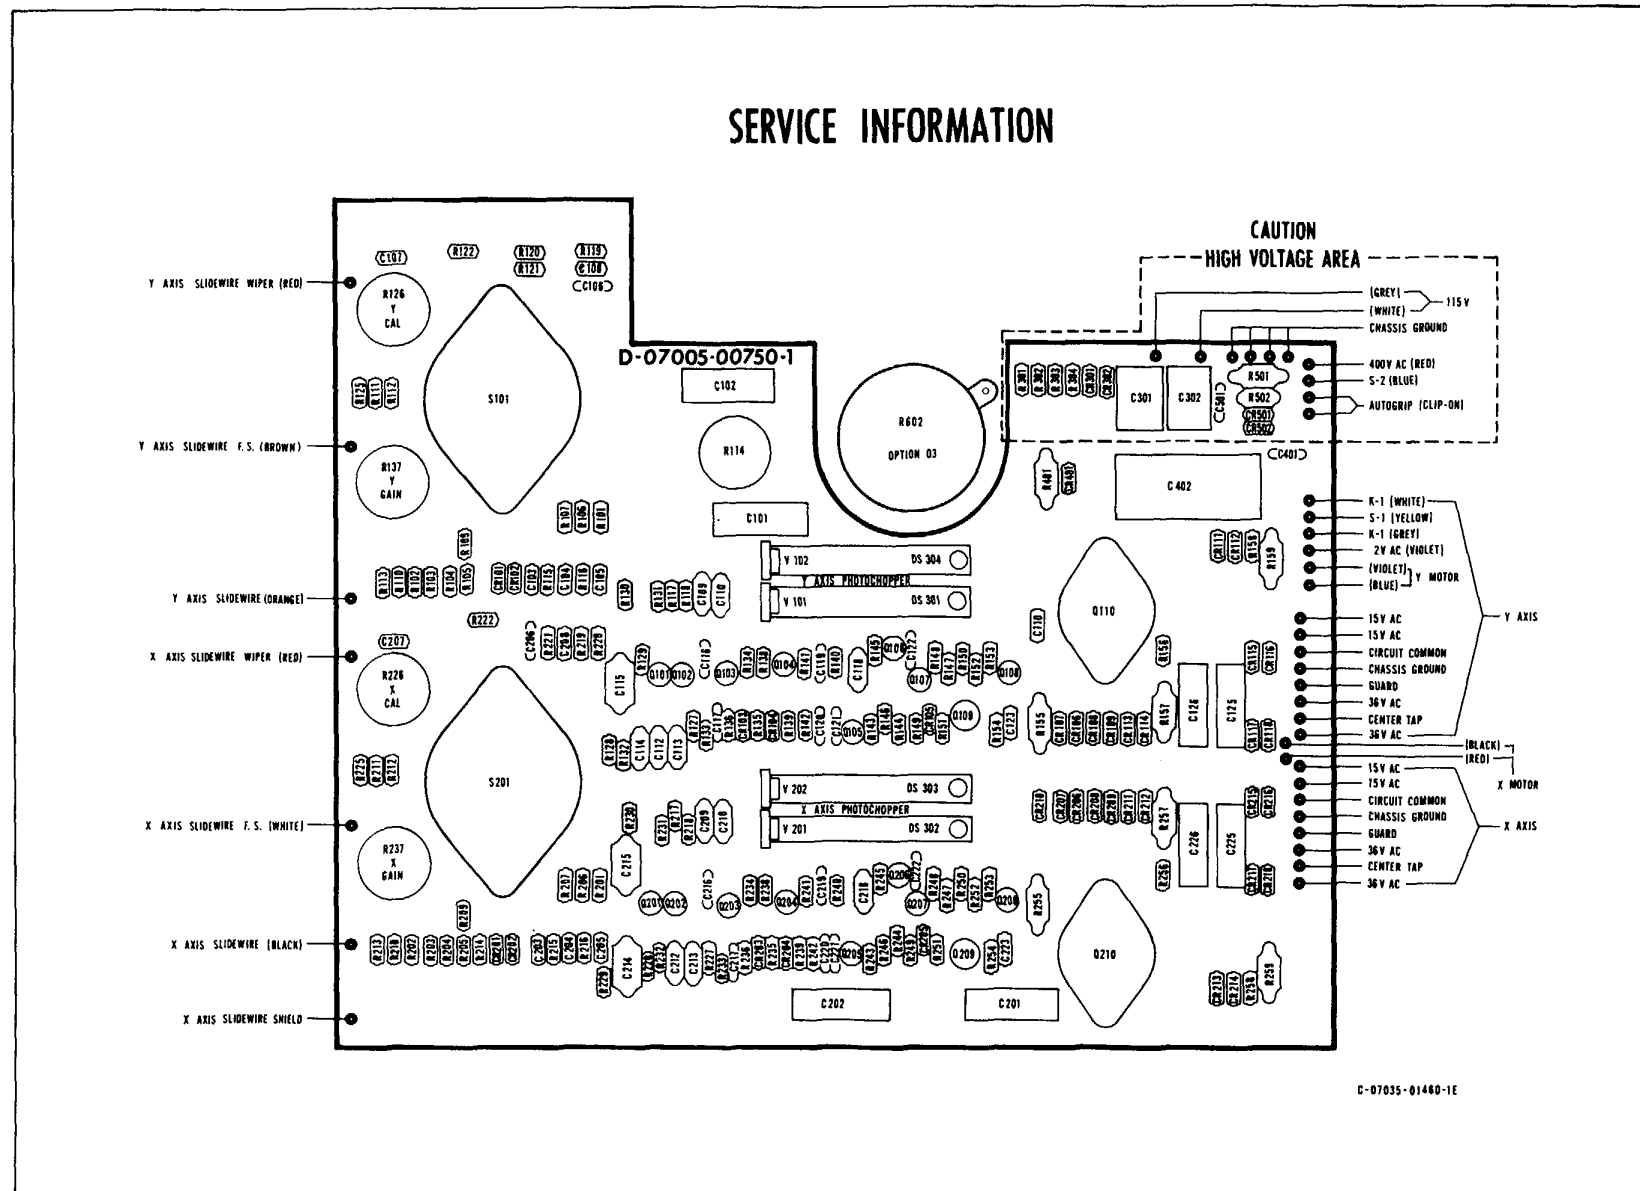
COMPONENT IDENTIFICATION - CIRCUIT BOARD
